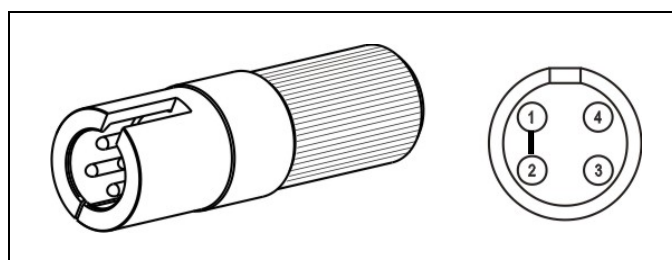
Male plug connector cod. 09-9767-00-04 (front view).
